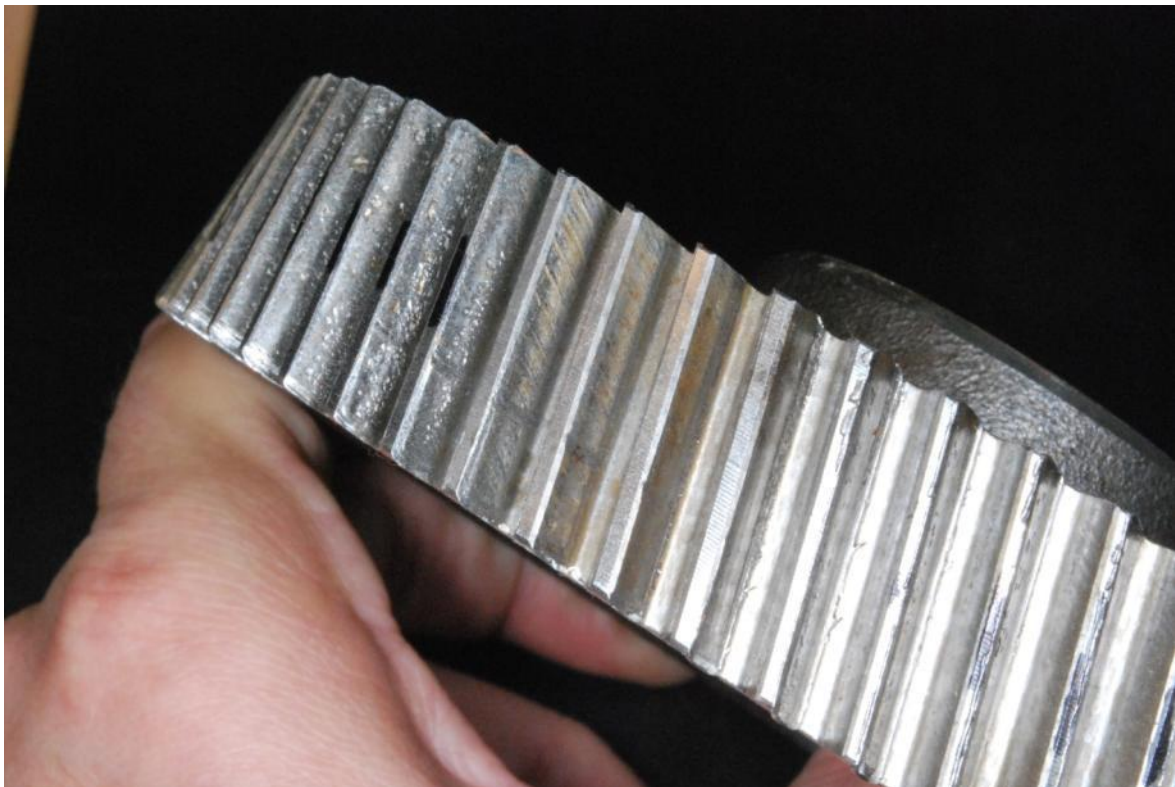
Silver Wing - On the camshaft timing gear there are six equi-spaced groups of damaged teeth, 60° apart.
